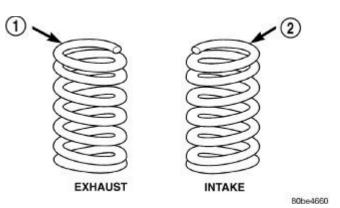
Valve Spring Identification Courtesy of CHRYSLER LLC
